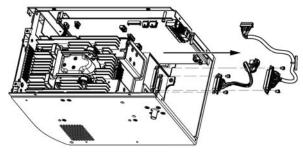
Auxillary Illuminator Power Supply Cable Connectors
